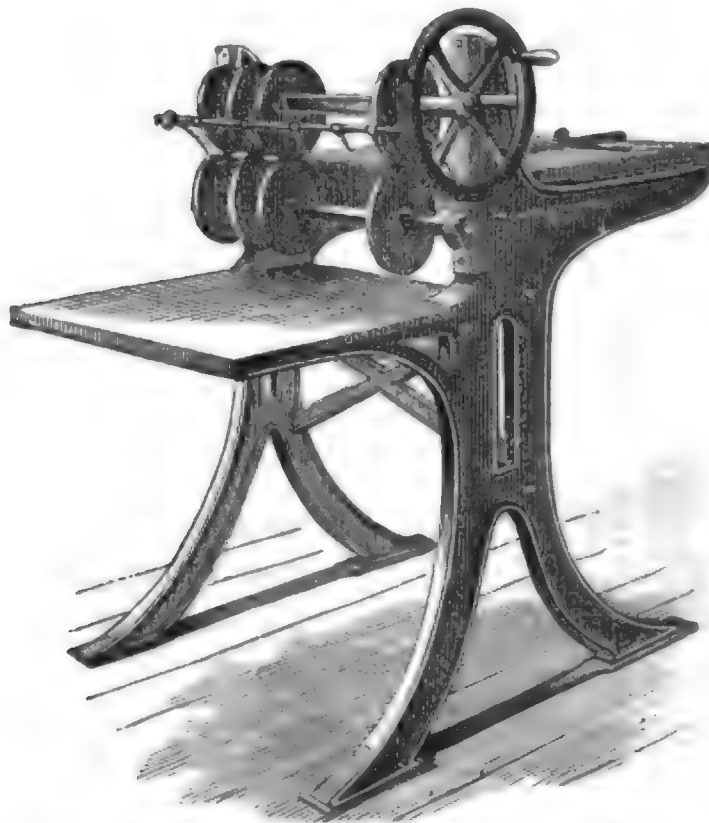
will take a sheet 2ft. 6in. wide, and of unlimited length.
